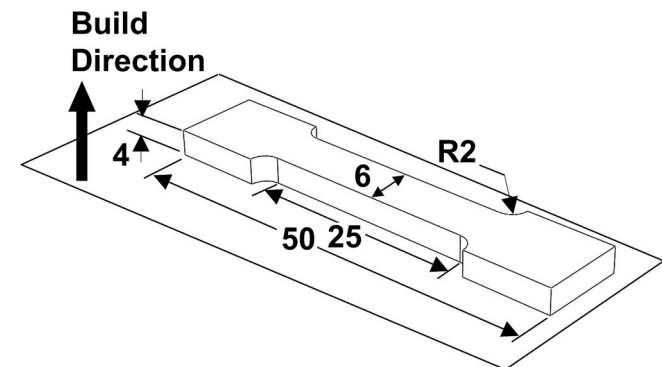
Tensile test specimen geometry and build direction. Dimensions in (mm).
